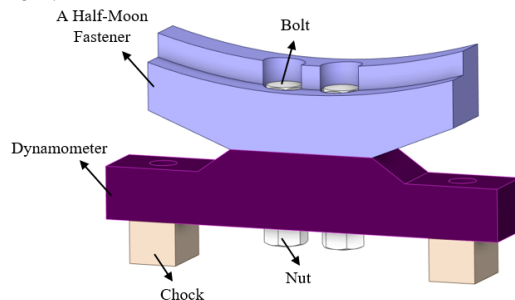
The assembly view of the dynamometer, half-moon fastener part, and chocks.
